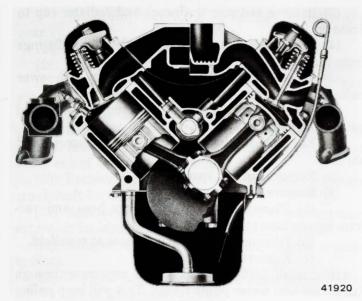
B-124 Sectional View of Eight-Cylinder Engine Assembly
